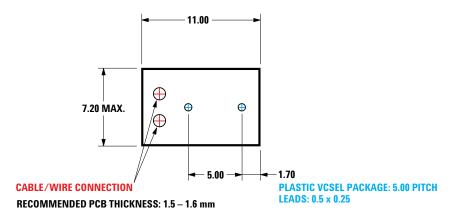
Suggested ADNV-6340 PCB mounting guide.
